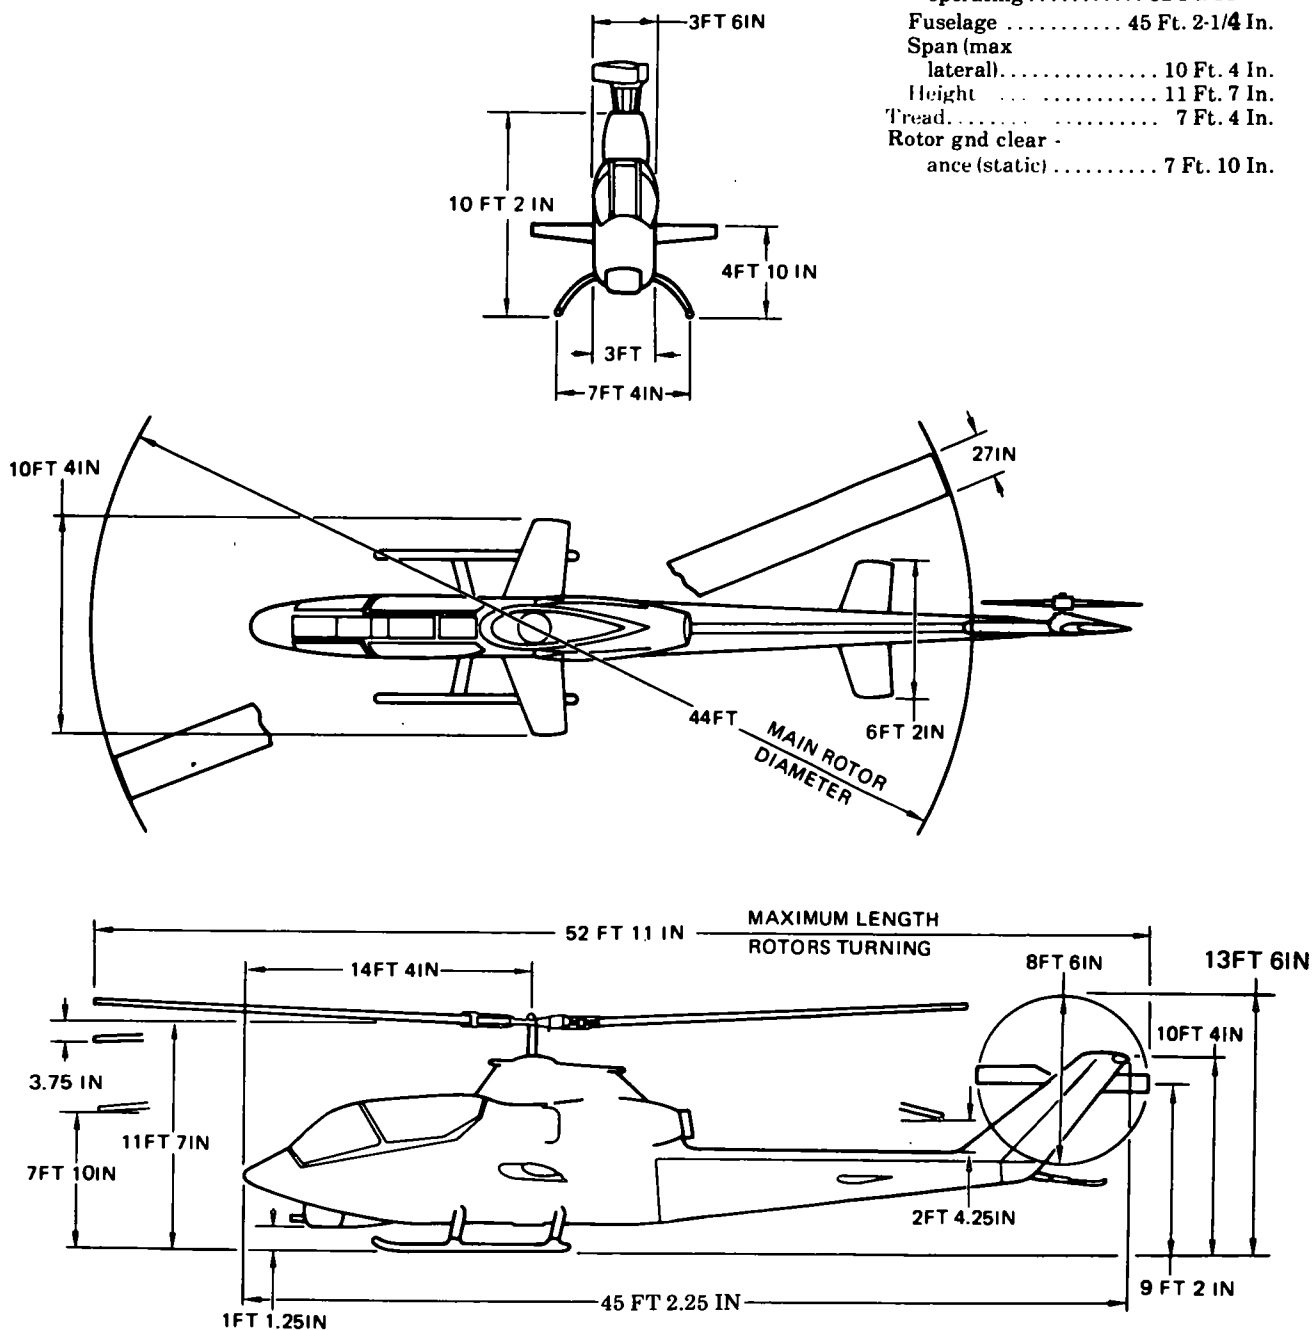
Principal Dimensions, AH-1G and TH-1G
